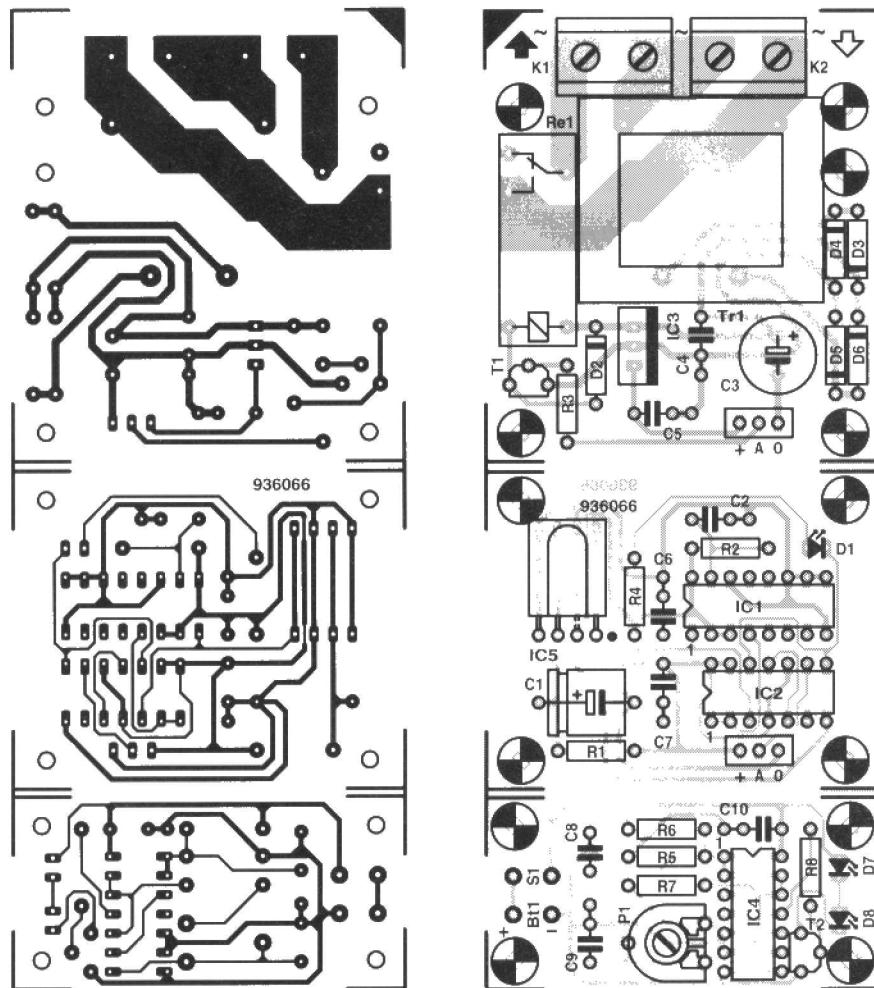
Track layout (direct reading) and component mounting plan of the printed circuit board for the infra-red controlled switch. This board is available ready-made through our Readers Services (see page 110).
